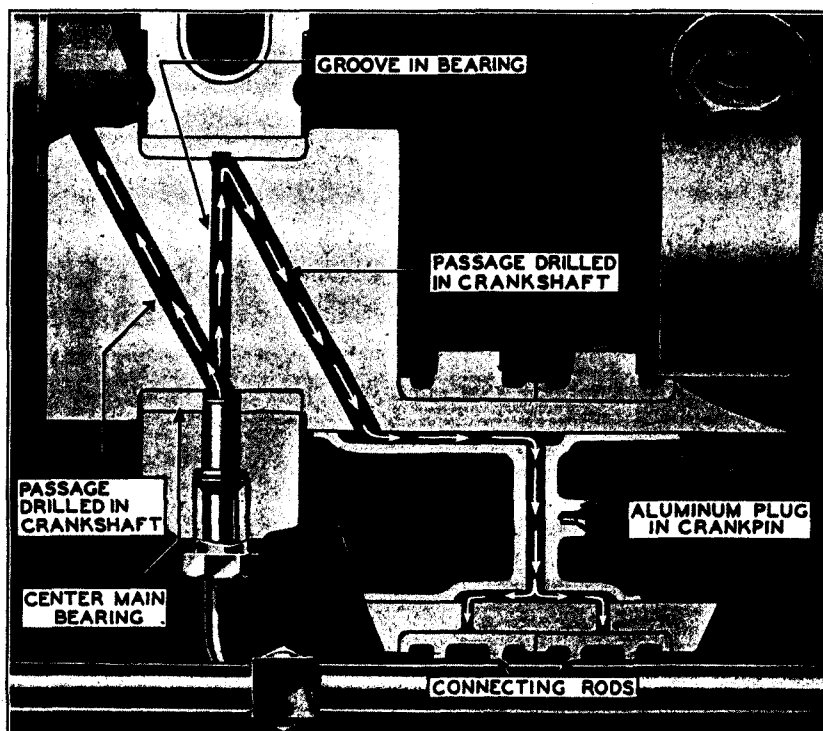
Section of Crankshaft Showing Oil Passages to Connecting Rod Bearings
